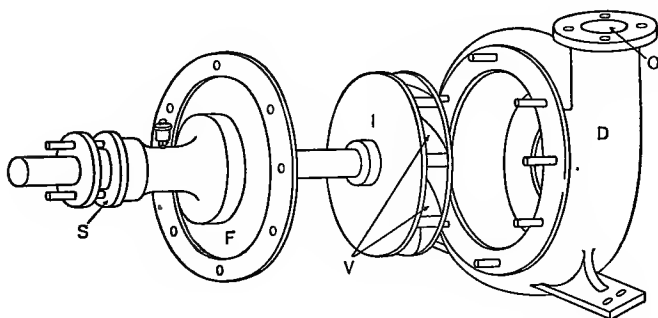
The parts of a simple, cheap centrifugal pump.
